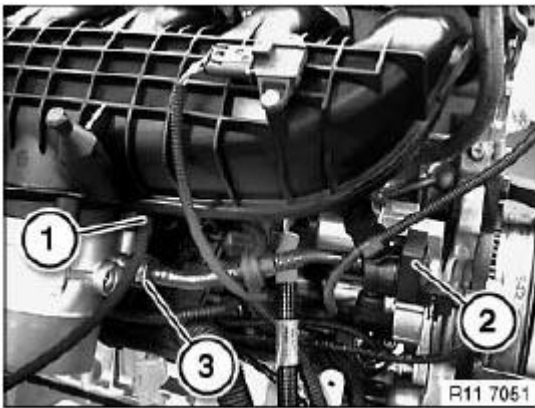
Identifying Vacuum Hose, Tank Vent Valve And Hose
